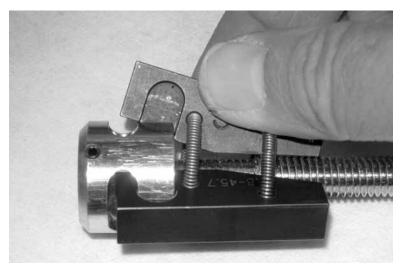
Pull the clamp legs up out of the drawplate to remove them.
